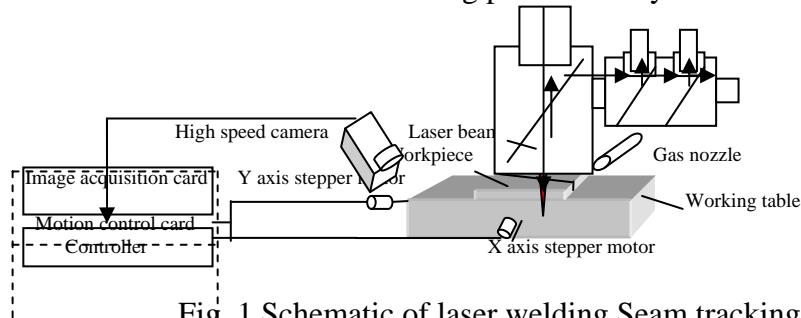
Schematic of laser welding Seam tracking system
